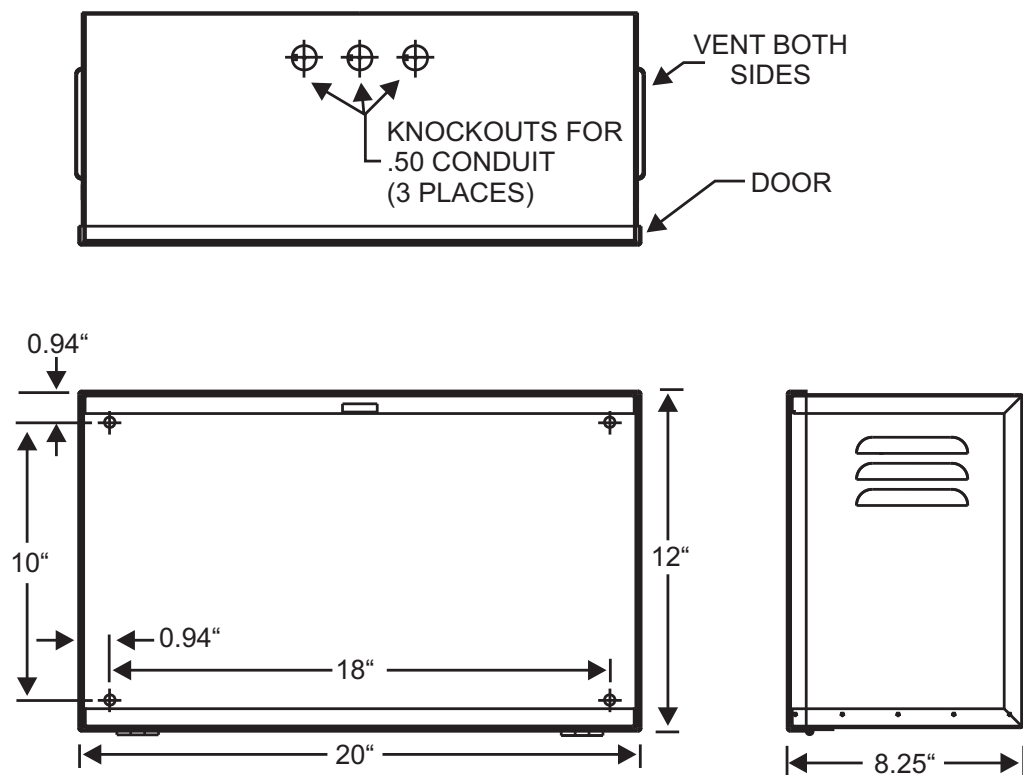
Mounting Dimensions for Large Capacity Battery Box
